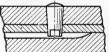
The large end of the pin comes just below the surface of the external member it is holding and is staked as shown in the plan view. These little swellings, or burrs, straighten out or shear off if it is necessary to remove the pin, but usually will score the surface of the pin. It should be noted that cast iron does not stake readily as it is brittle and will not flow.
